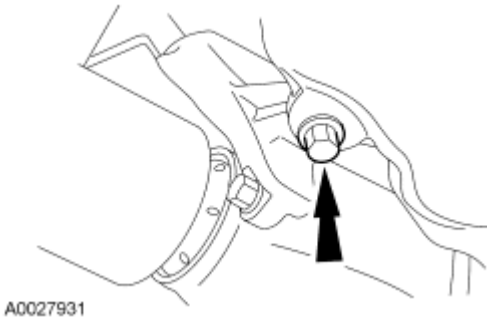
Locating Oil Pan-To-Transaxle Bolt
